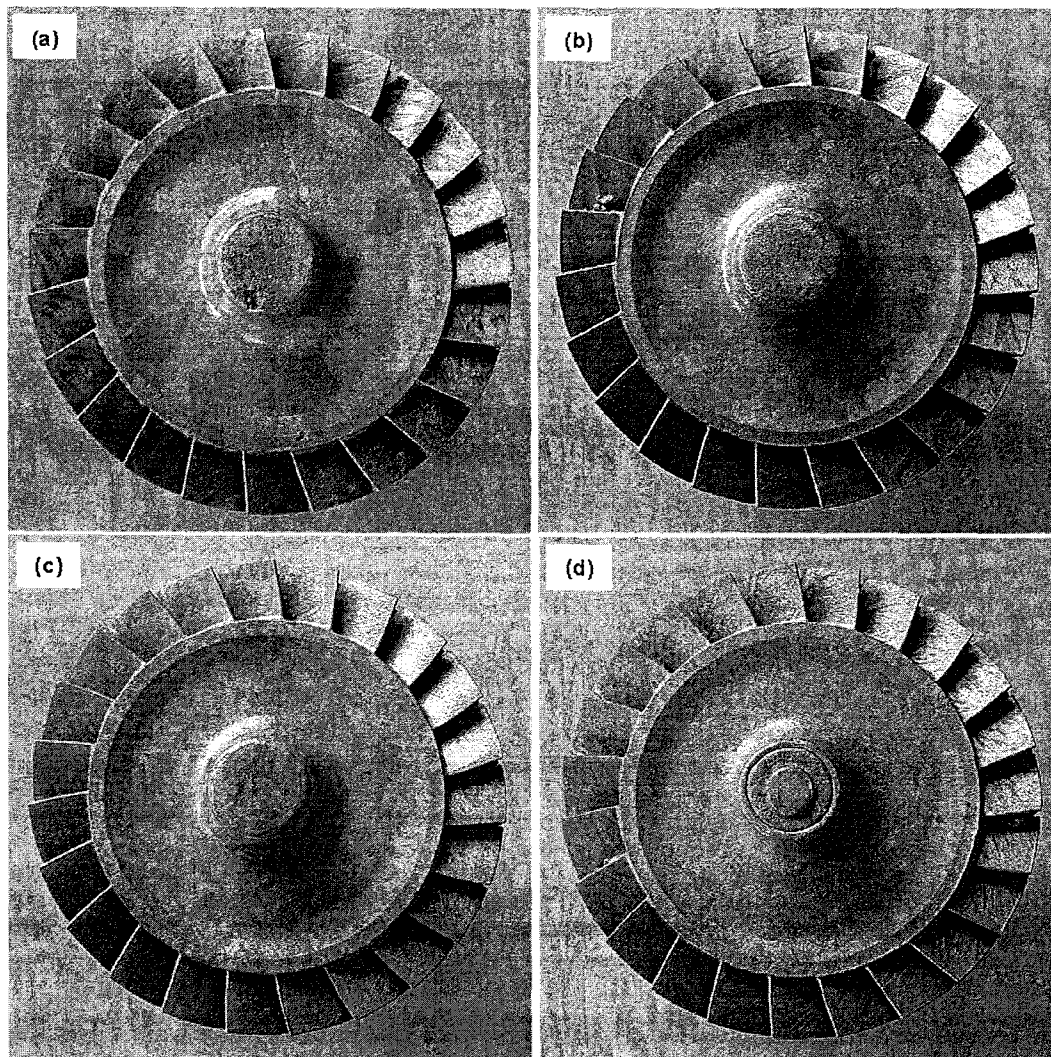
Macrostructure of integral rotor casting made by using (a) XX, (b) VX, (c) XI and (d) VI casting process.
